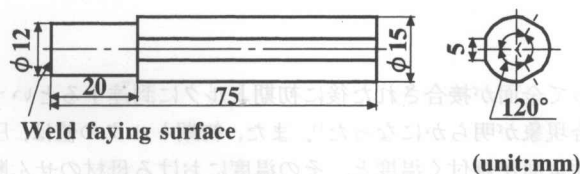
Shape and dimension of the friction welding specimen.
